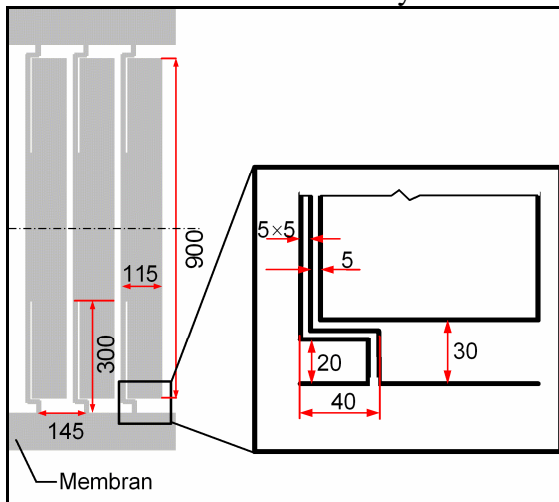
New mirror layout with larger mirror plates and stress reducing flexure design
